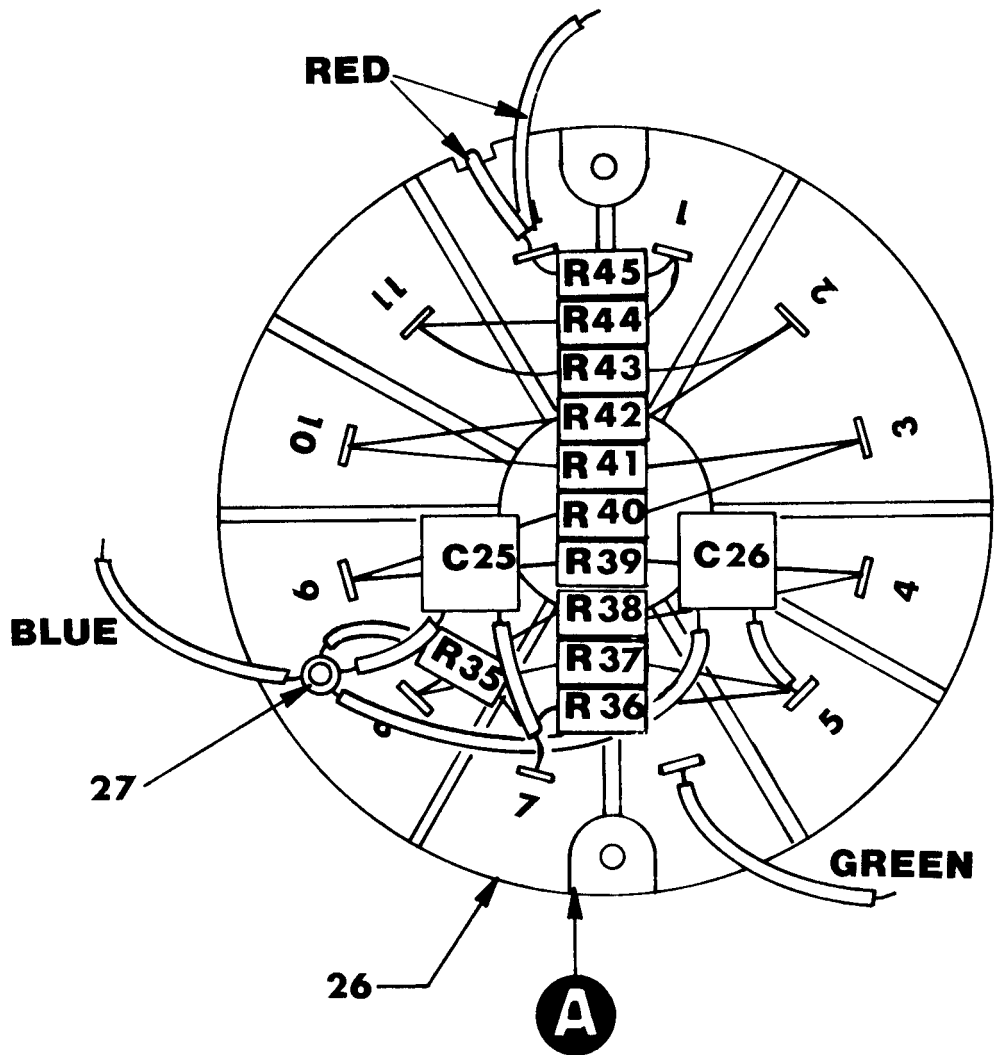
X-Ray Probe, Exploded View (Sheet 1 of 2 Sheets)
